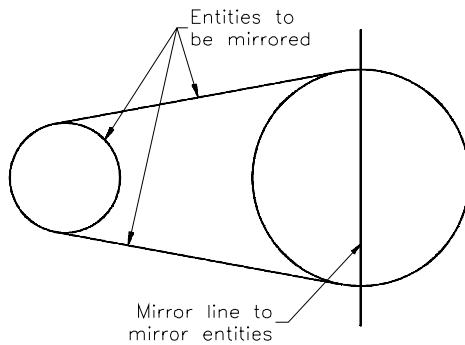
Selecting the geometries to be mirrored about the mirror line
